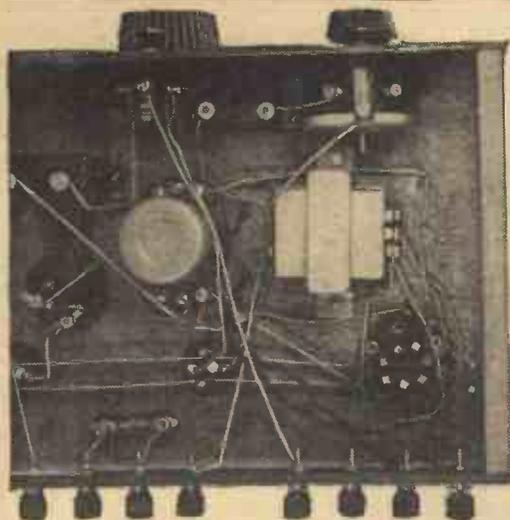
This photograph shows the "driver" transformer and new wiring.
